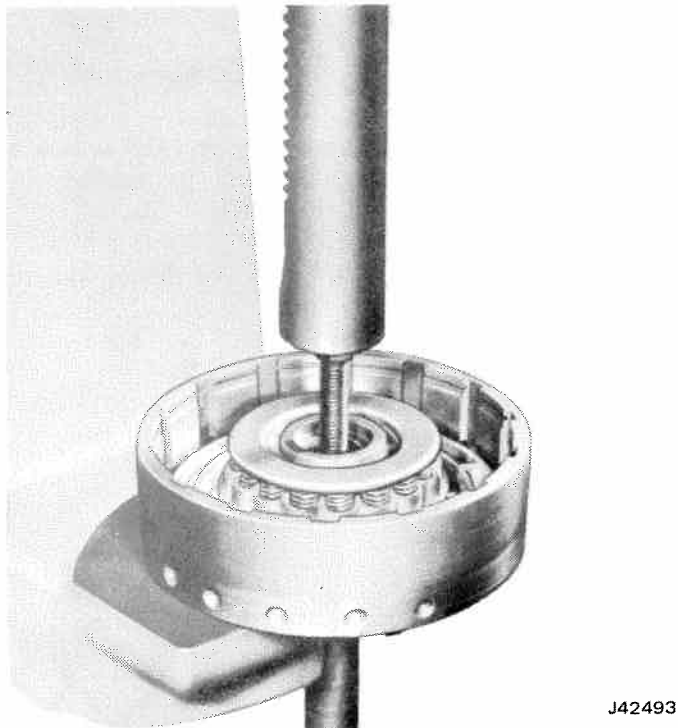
Removing Hub and Thrust Washers From Forward Clutch Assembly
